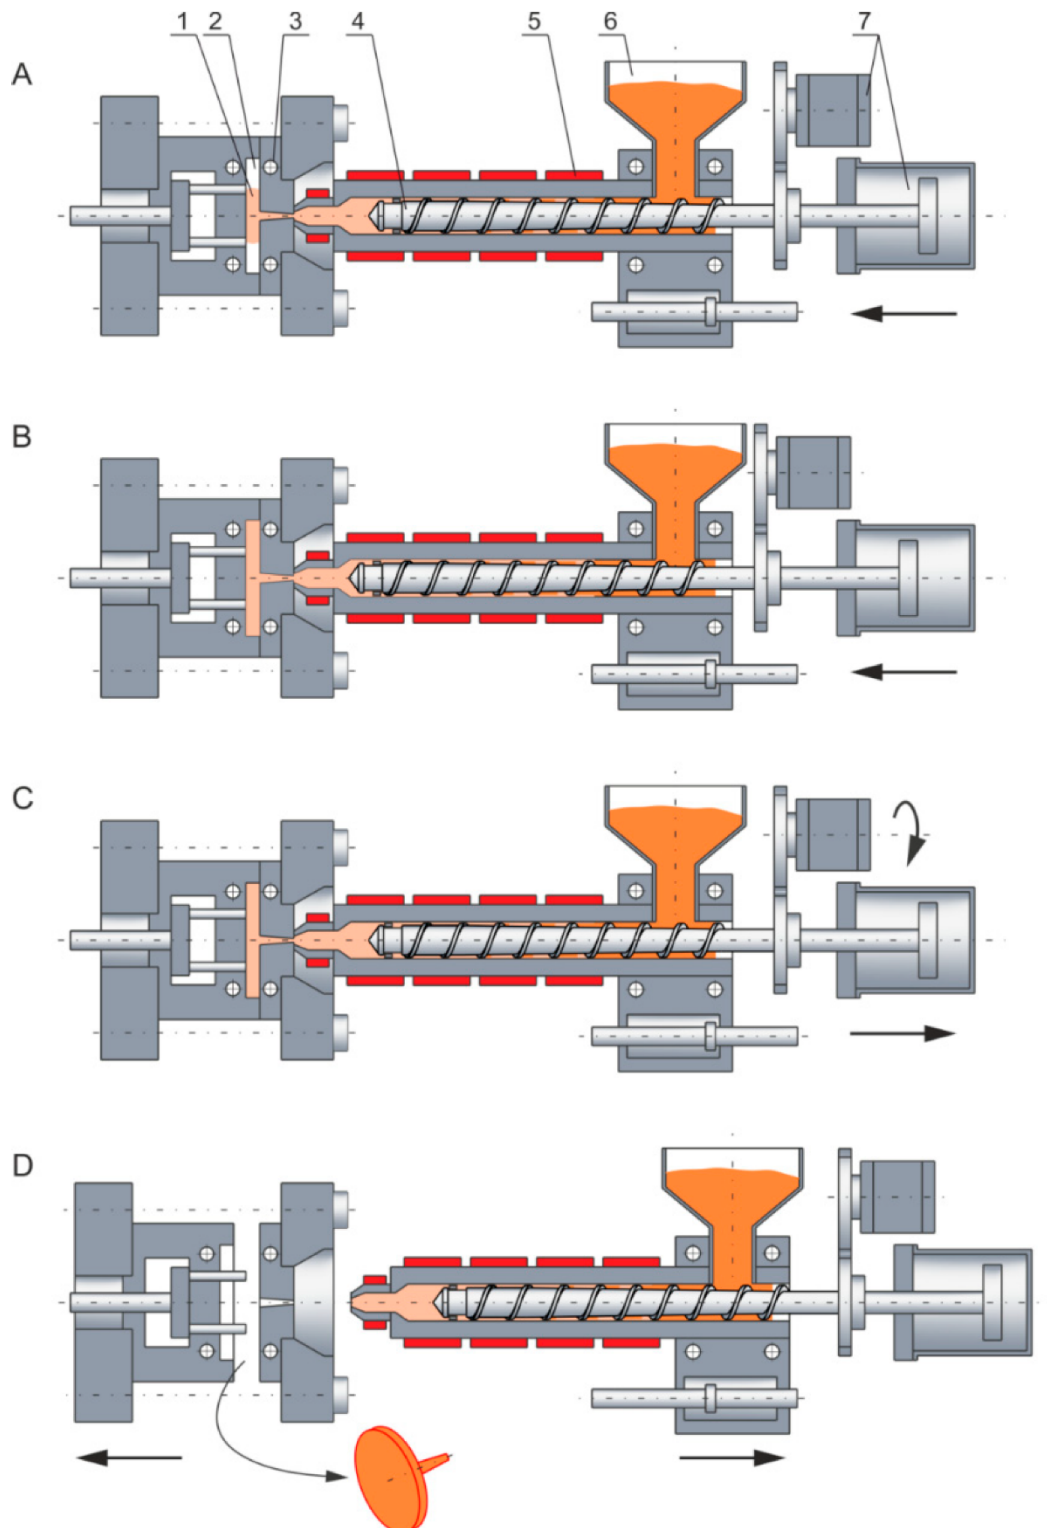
Injection molding cycle: (A) injection/filling, (B) holding/packing, (C) plasticisation/melting, and (D) mold opening and part ejection; 1—molded part, 2—mold cavity, 3—cooling channels, 4—screw, 5—heaters, 6—hopper, 7—drive system.
